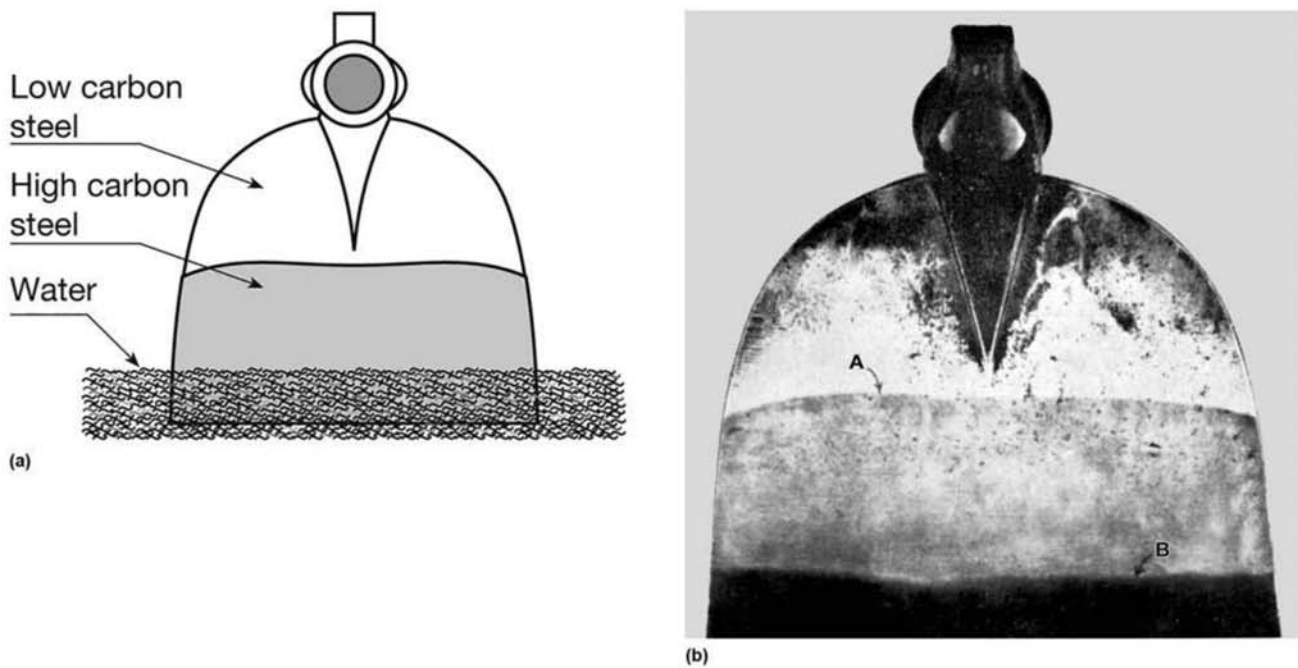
(a) Manufacturing schematic of a forge welded hoe blade and its selective quenching. (b) Macrograph. Line A indicates the forge weld line of the two steels. Line B indicates the hardened region, as shown in panel (a). As in many cases this used to be an artisanal process, the transition between the two steels may fall outside of the hardened zone (as indicated in Fig. 10.76) or inside the hardened zone (Fig. 10.77).
